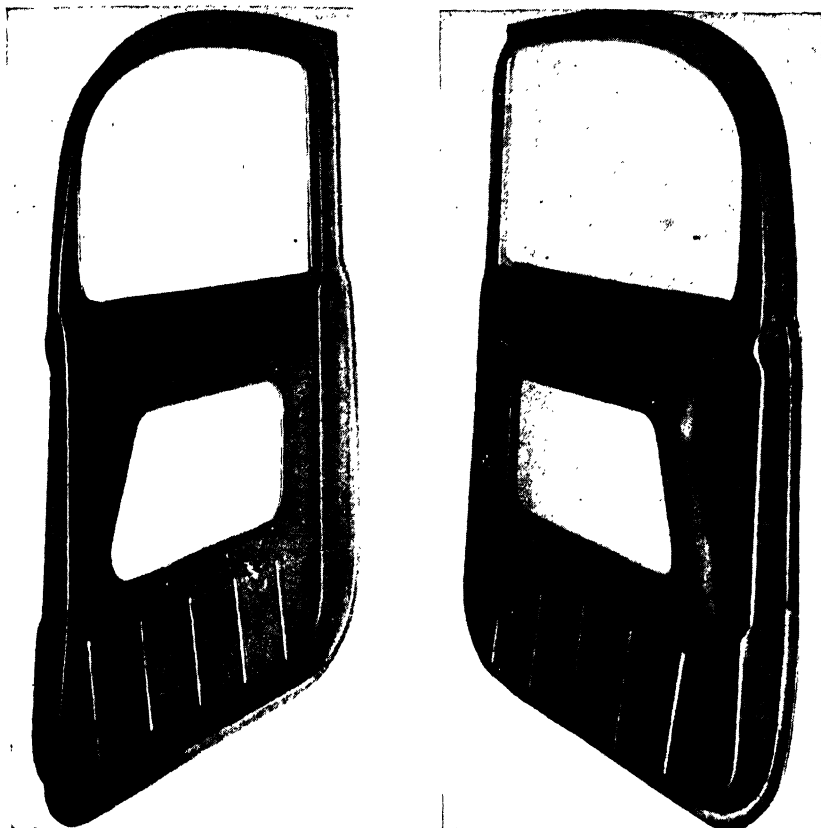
Airplane door, approximately 34 in. long and 22 in. wide. Made of aluminum alloy on a 36- by 48-in. Cecostamp.
